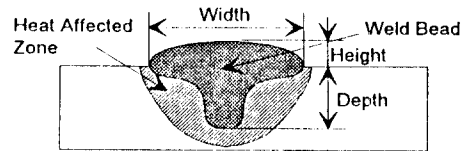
Cross-section of weldment and definitions of weld bead geometries
